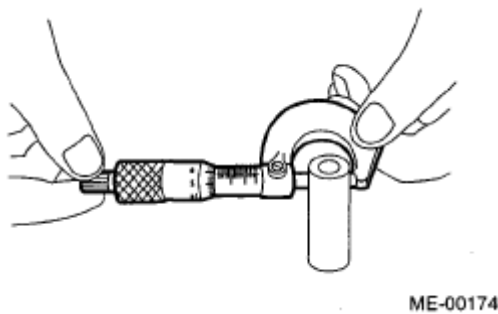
Measuring Clearance Between Piston Pin And Bushing (2 Of 2)
